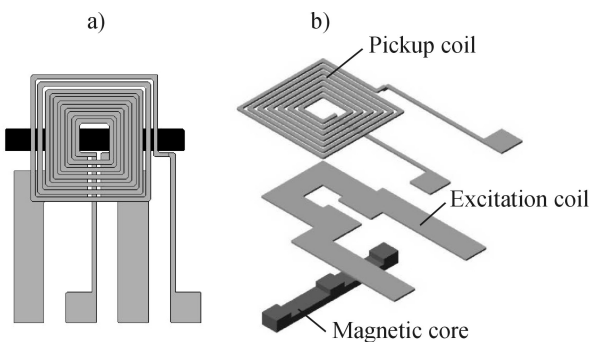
Optimized Design of the Eddy Current Microsensor; (a) Top View; (b) Exploded View
